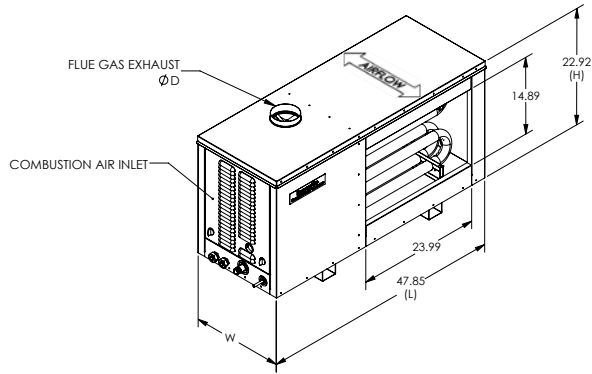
IN-SI (SEPARATE INLET EXHAUST INDOOR)
